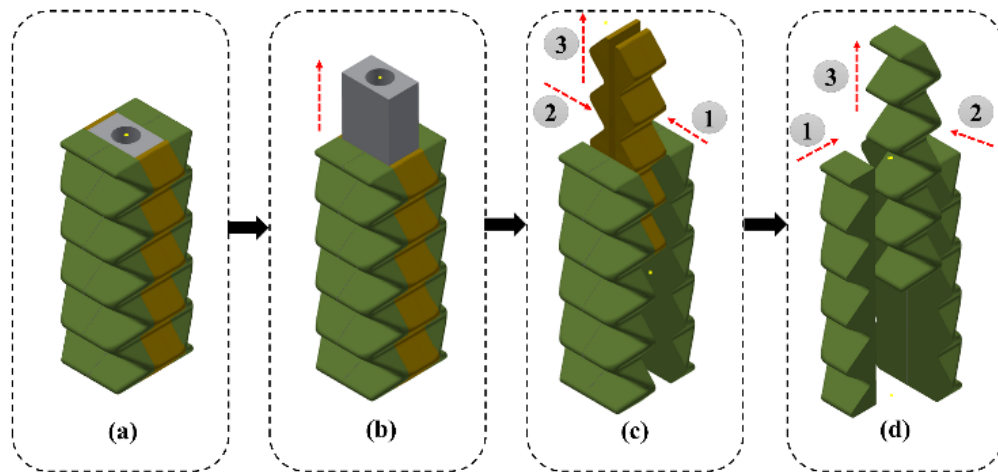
Removal steps for the seven-piece accordion pattern mold. (a) CAD model of the assembled mold. (b) Remove the middle part first. (c) Push the two yellow side pieces together, then pull them out. (d) Remove the four green side pieces by sliding and pulling one at a time.
